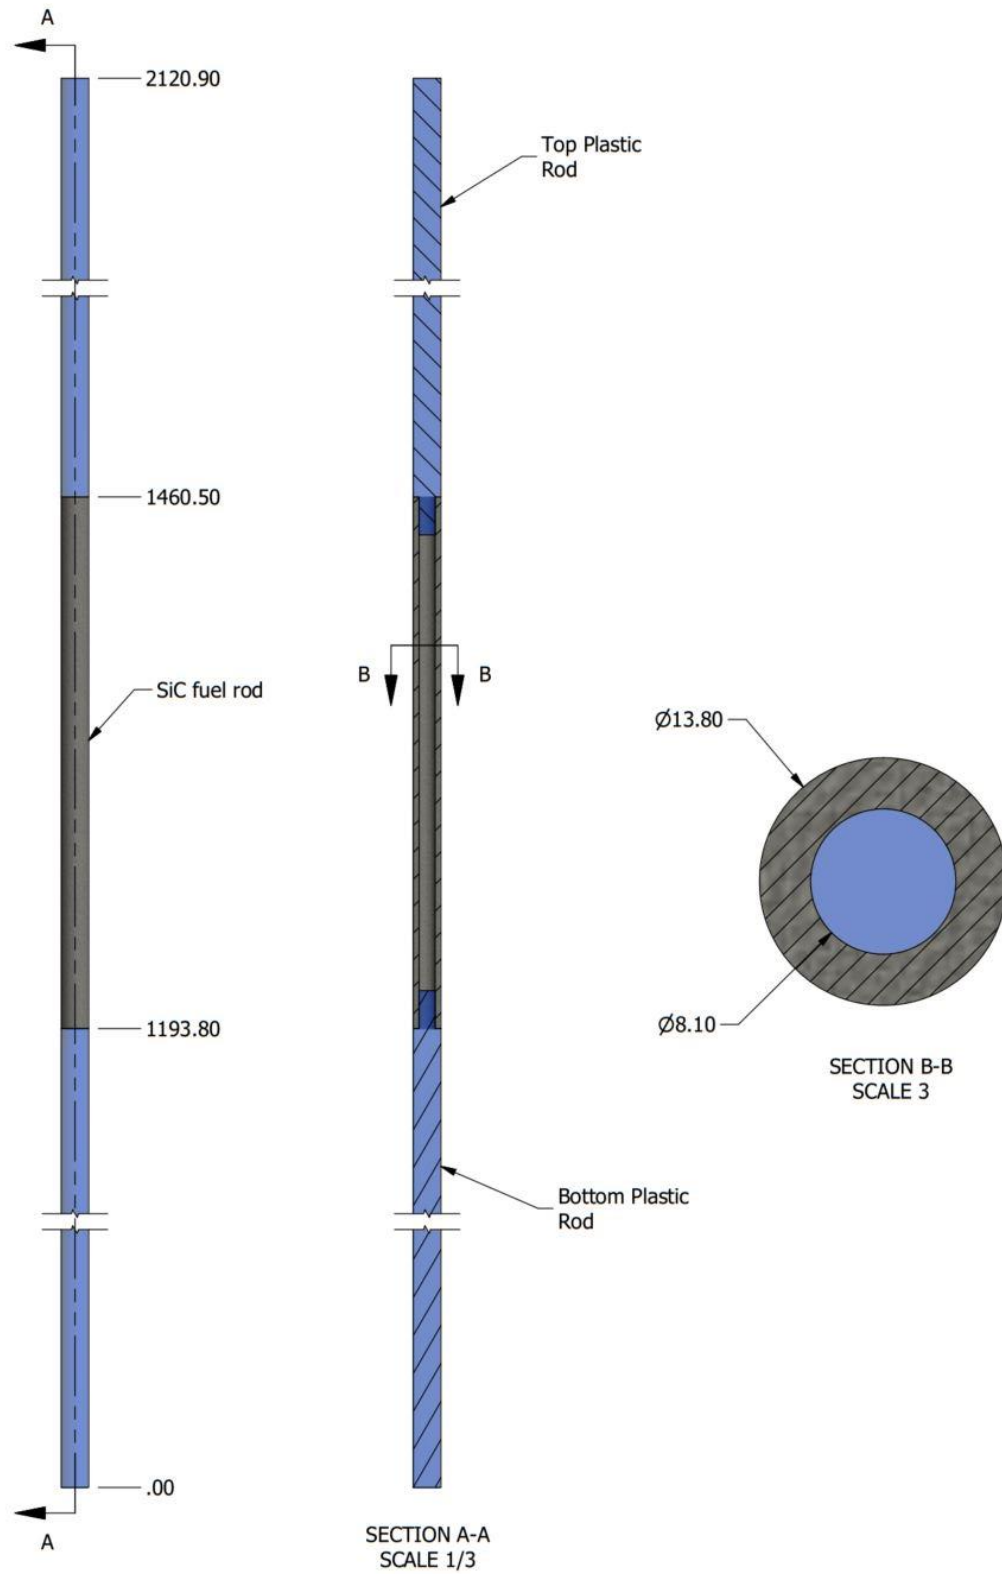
Single Simulated Fuel Rod (Dimensions in mm)
